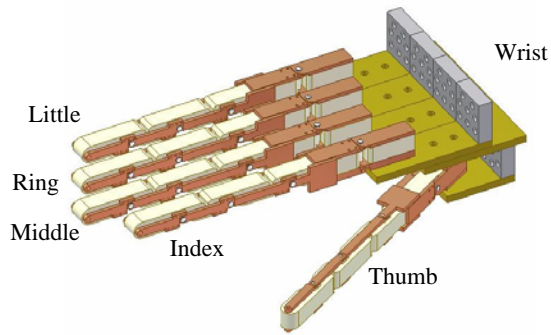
Three-dimensional CAD image of five fingered robot hand
